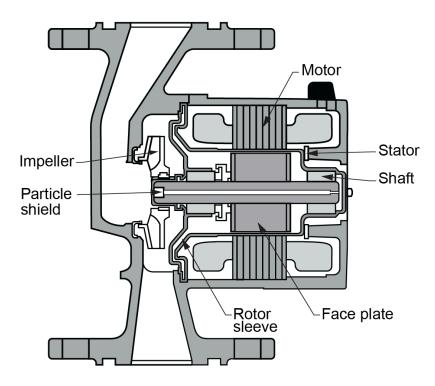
Wet-rotor circulator cutaway. (Skilled Trades BC, 2021) Used with permission.
